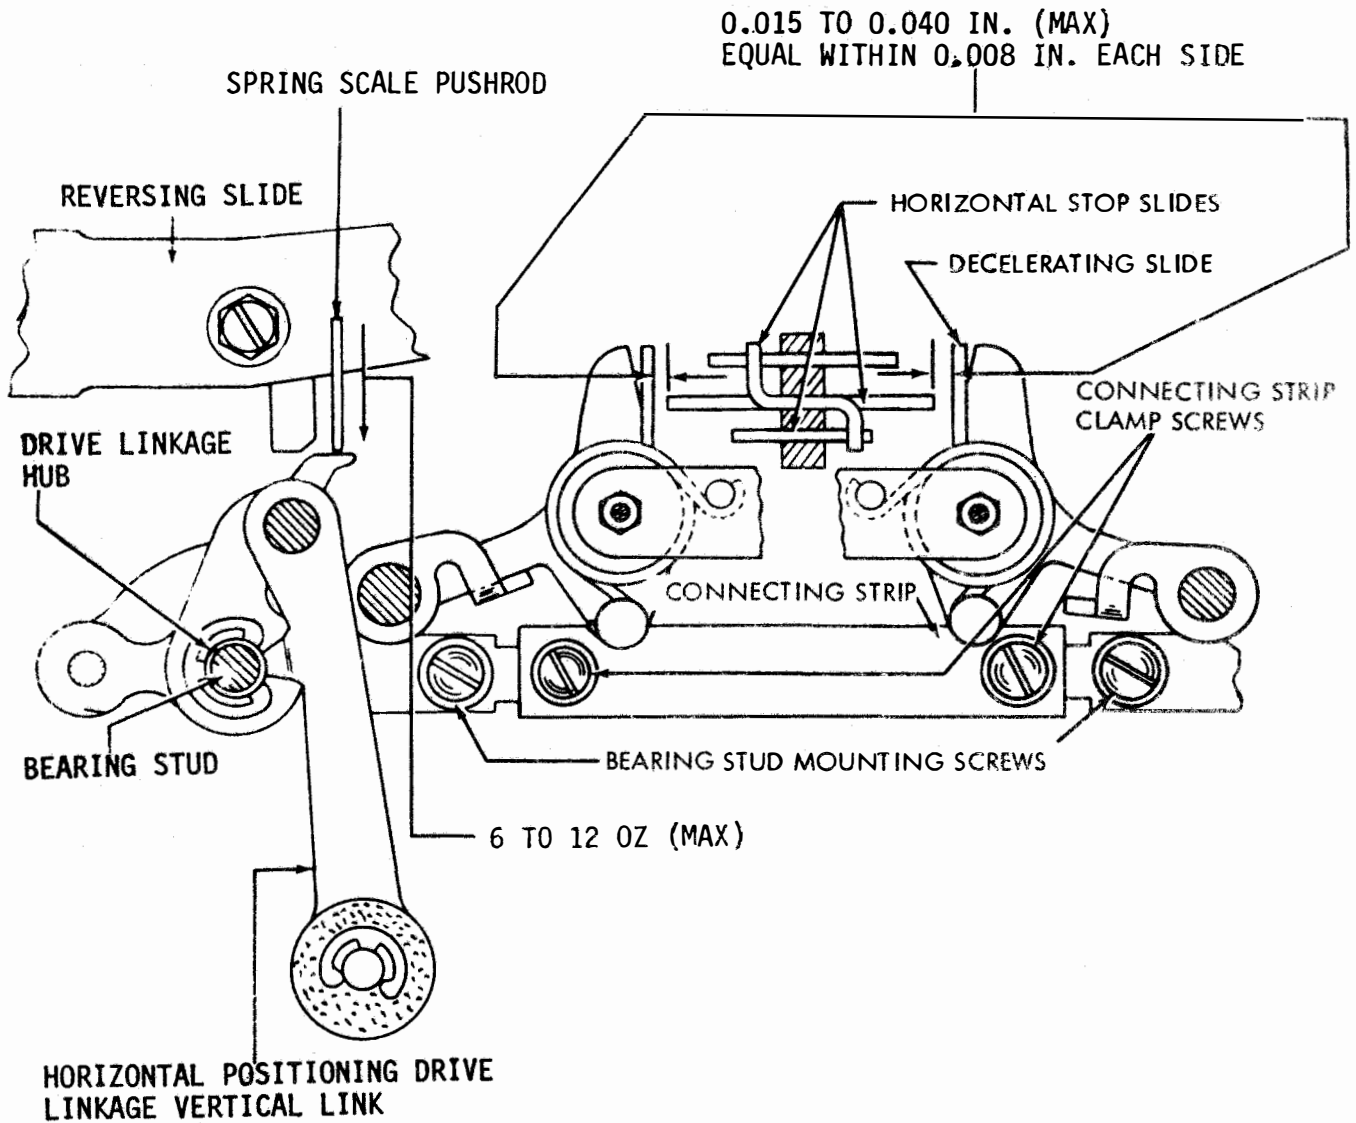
Horizontal Positioning Drive Linkage and Drive Linkage Torsion Spring with Earlier Design Drive Linkage and Torsion Springs, Front View
